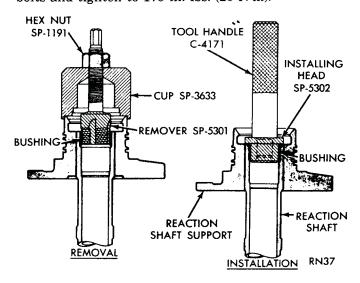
Replacing Reaction Shaft Bushing (A-727)
